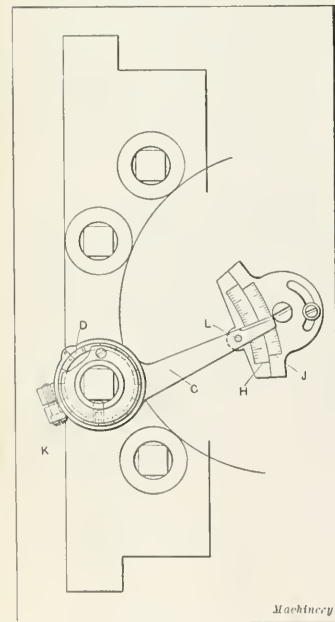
Assembly View of Auxiliary Feed-screw Dial
